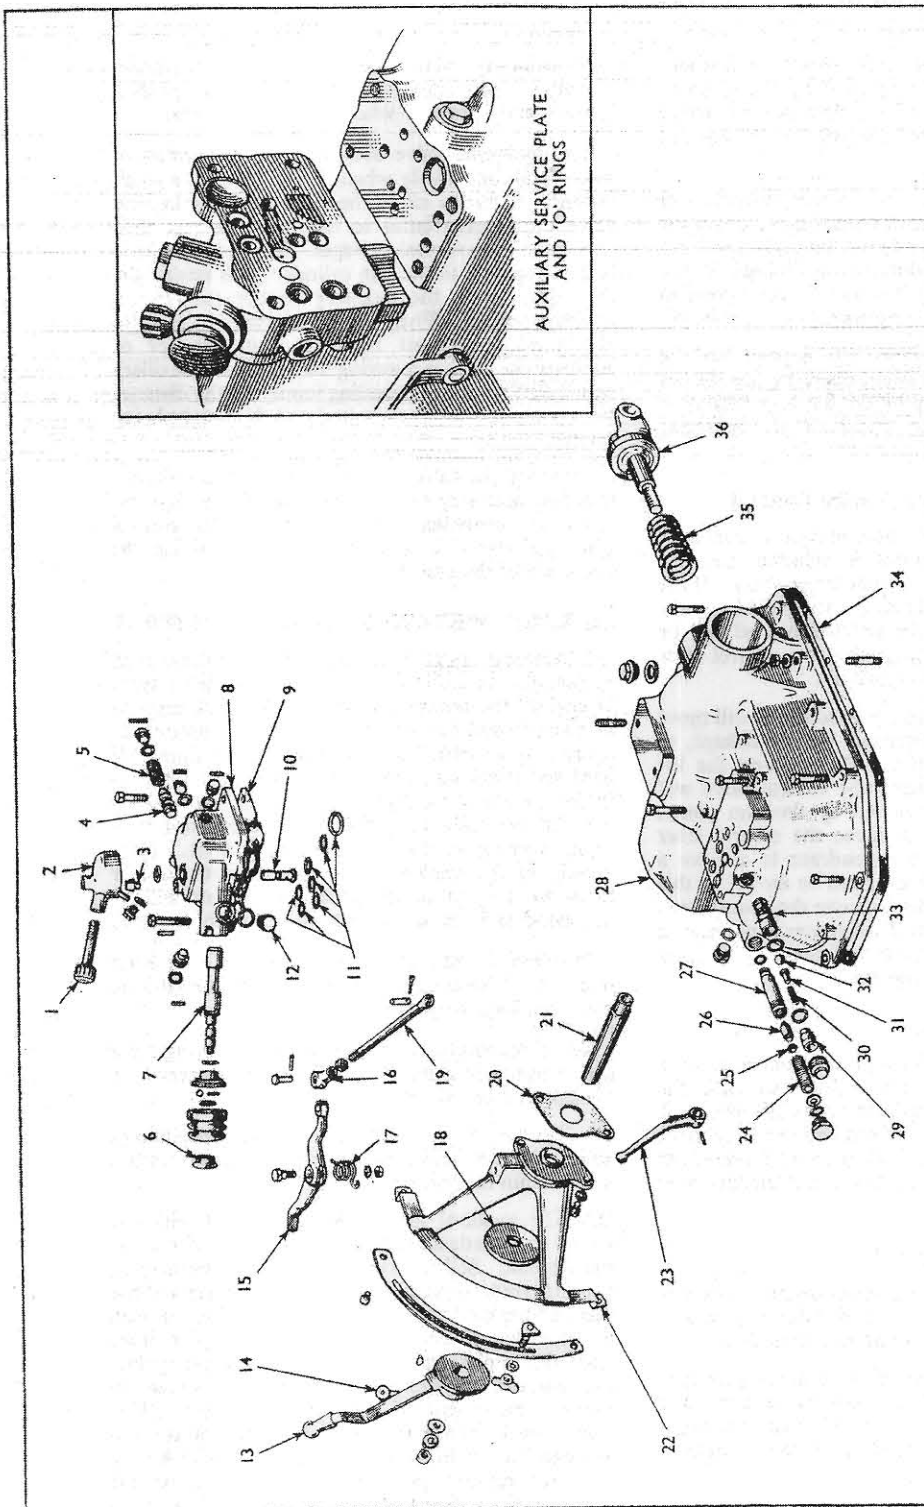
Hydraulic Lift Cover Assembly, Auxiliary Service and Flow Control Valve Assembly
